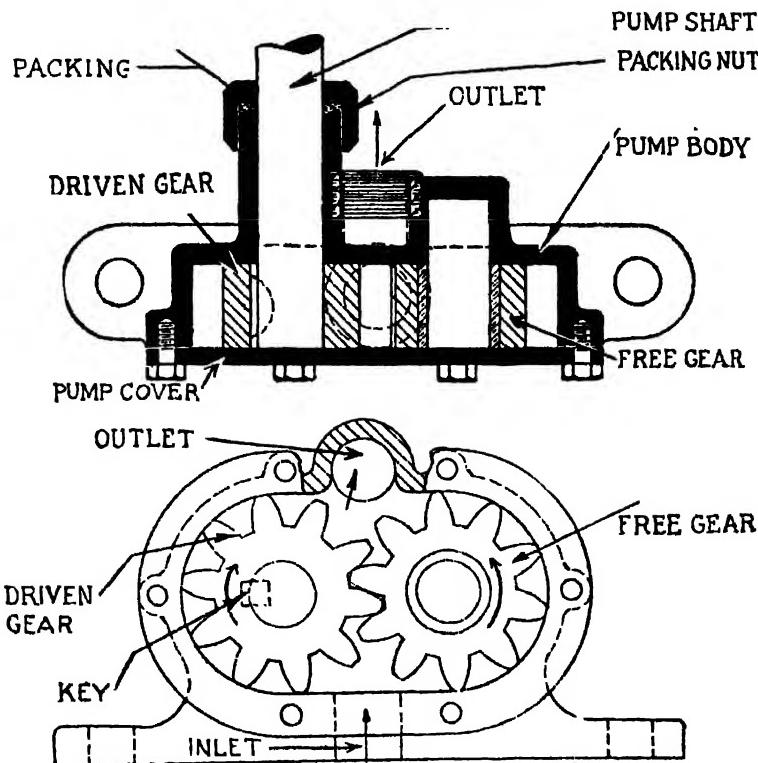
Sectional View Showing Construction of Gear Pump.
